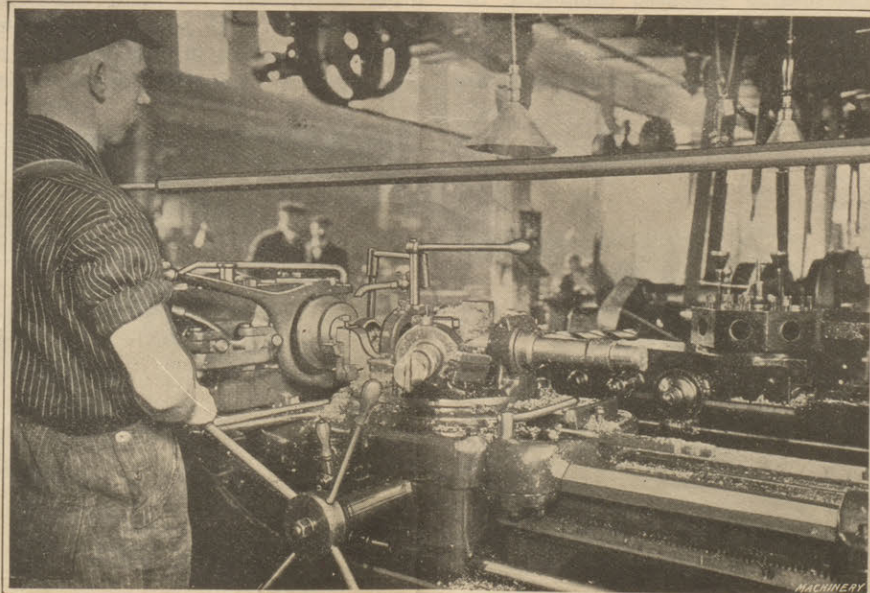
Third Machining Operation on Shrapnel Shell in a Flat Turret Lathe
